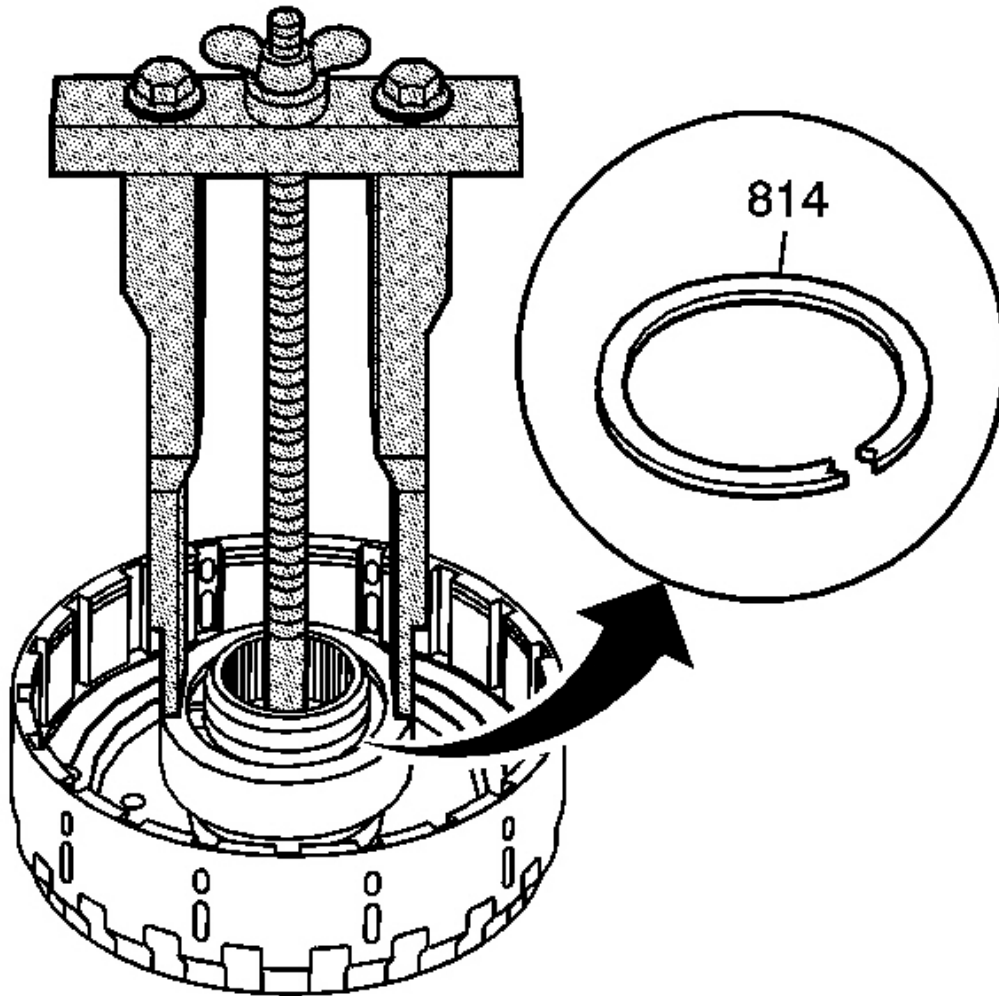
Removing 3rd Clutch Piston Retaining Ring Using Pliers
